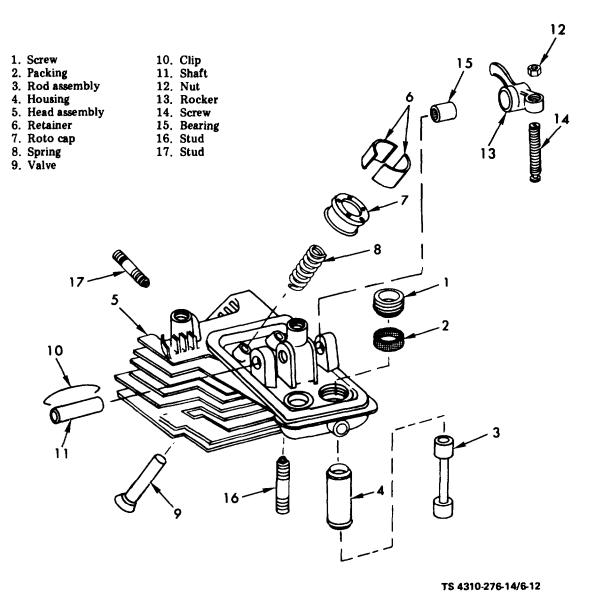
Cylinder Head, Disassembly and Reassembly
